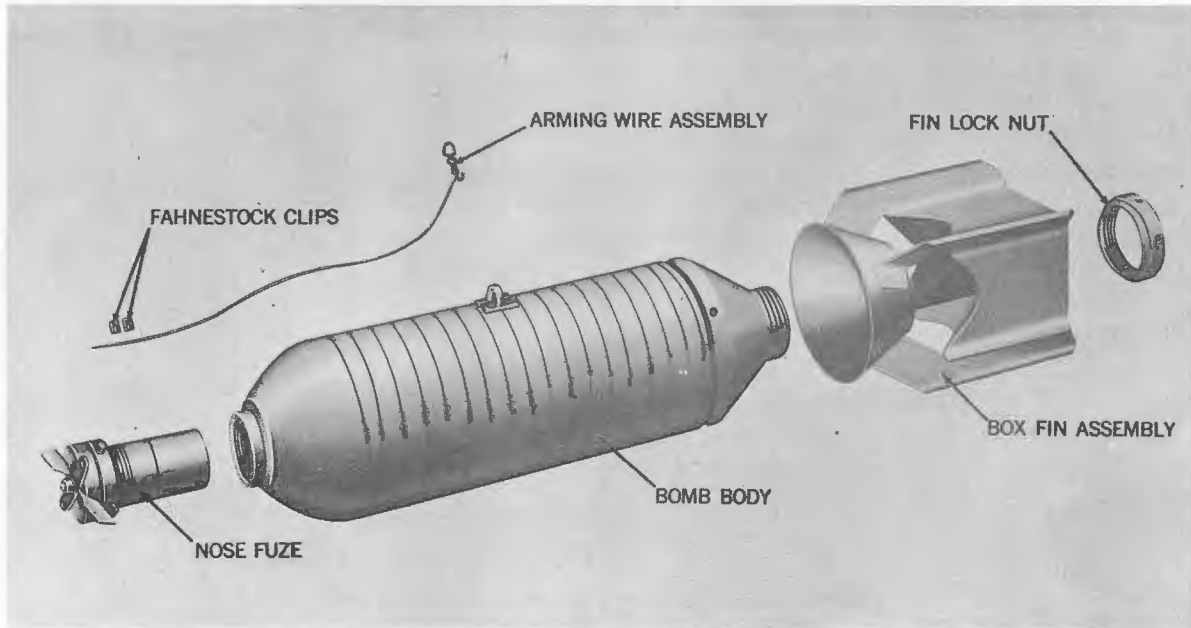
90-lb Frag Bomb M82, Exploded View.
